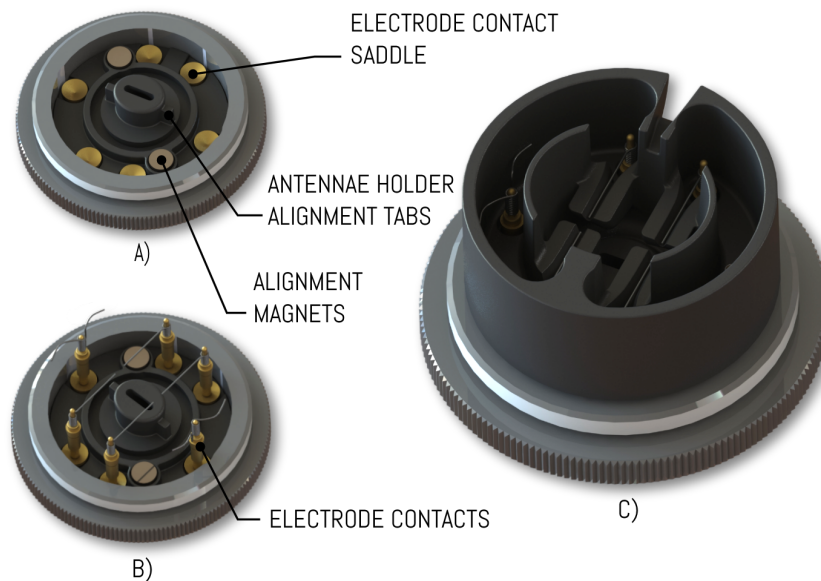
Faraday cage base SM1CP2 lid with SLA printed air insertion nozzle and electrode contact saddle support. A) Detail of the electrode contact saddle support showing the alignment magnets and contact saddles. B) Detail showing how the spring loaded electrode contacts connect with their saddles. D) Antennae holder attached to faraday cage base.
